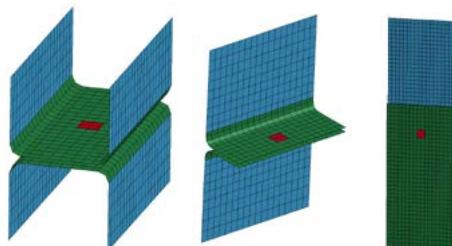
Finite element models of spot welded specimens: tension, peel and lap-shear specimen (from left to right)
